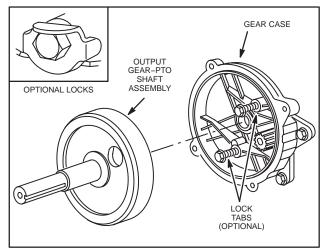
REMOVING DRIVE GEAR AND GEAR CASE
